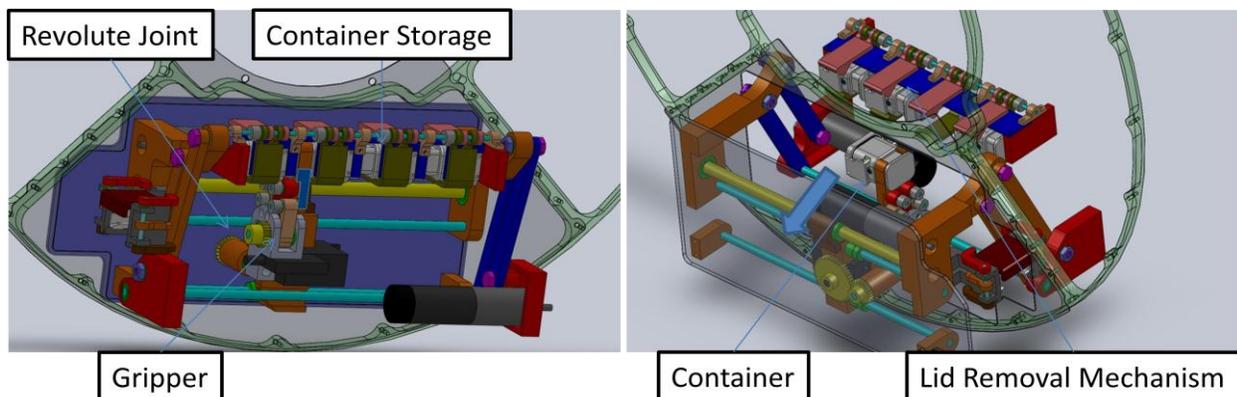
To remove a sample container, the gripper slides sideways along the ball screw and closes on the desired container. Axel deploys its instrument, which pulls the container out of container storage.
